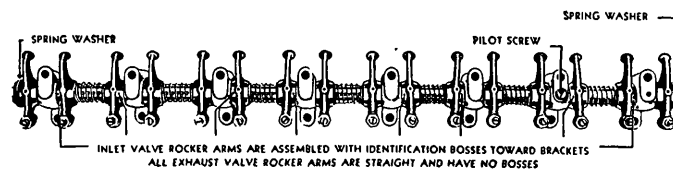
Rocker arm assembly, 1938-42 Series 60, 70, 80, 90
